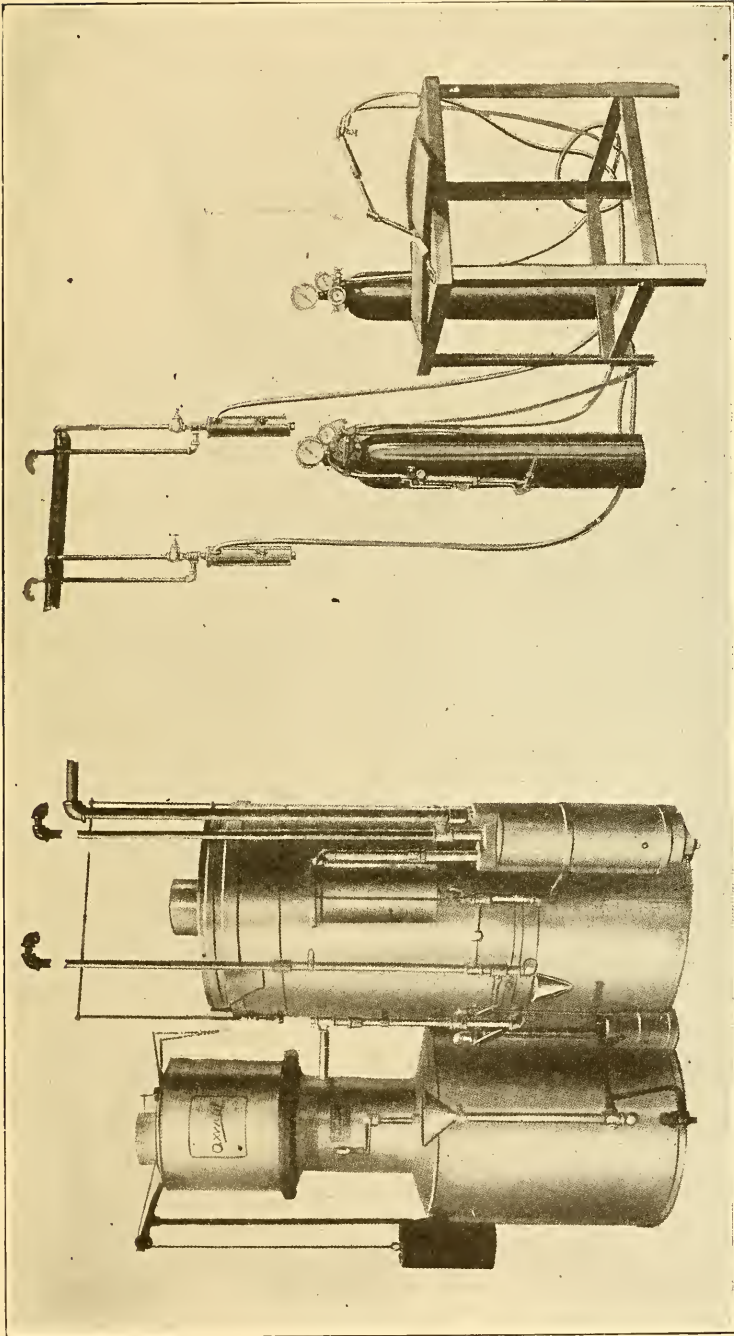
Oxxweld Acetylene Generator and Oxygen Cylinder Two-Station Outfit Connected for Welding and Cutting Work.
